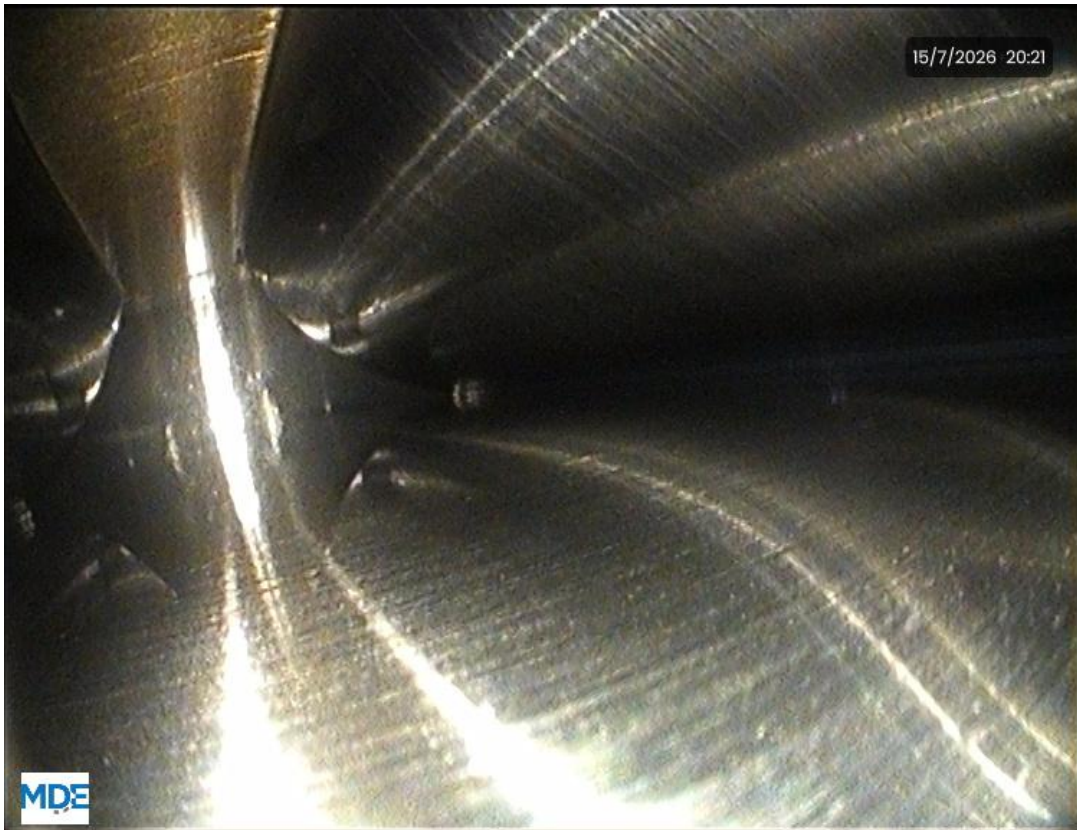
Bearing input shaft, driven end. No deviations have been observed.
